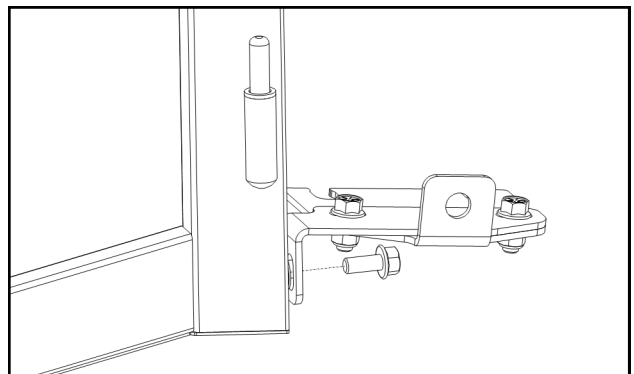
(Temporary Side Frame to Rear Mount Fastener)
